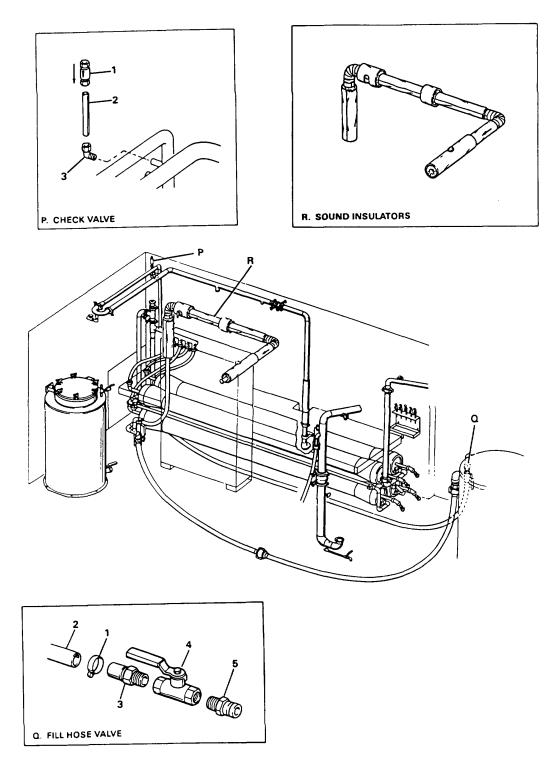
Low Pressure Piping (Sheet 5 of 8) Fill Hoses. Check Valves and Sound Insulating Blankets 4-194 Change 7
